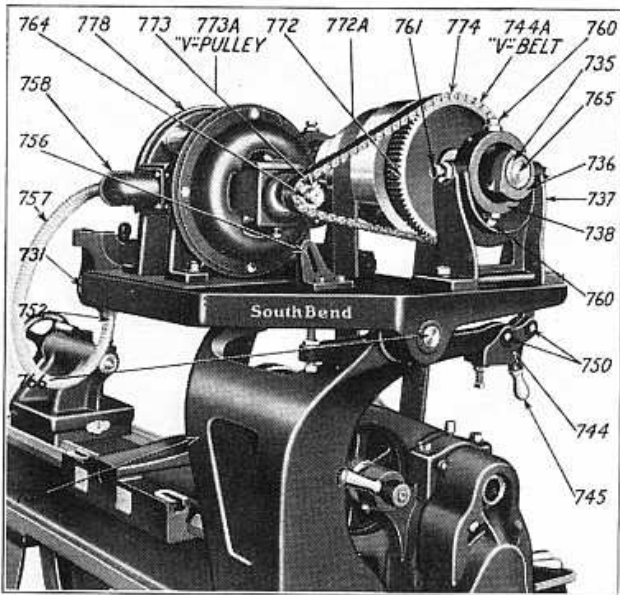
End View of Silent Chain Motor Drive Unit Showing Location of Parts and Numbers.
